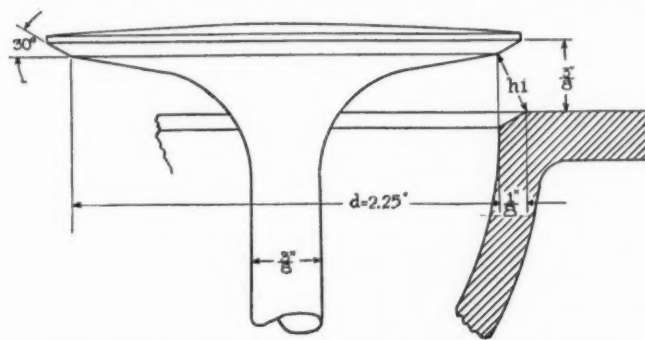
Full-size sketch, showing actual dimensions of a valve of the 22-70 hp. Mercer engine
